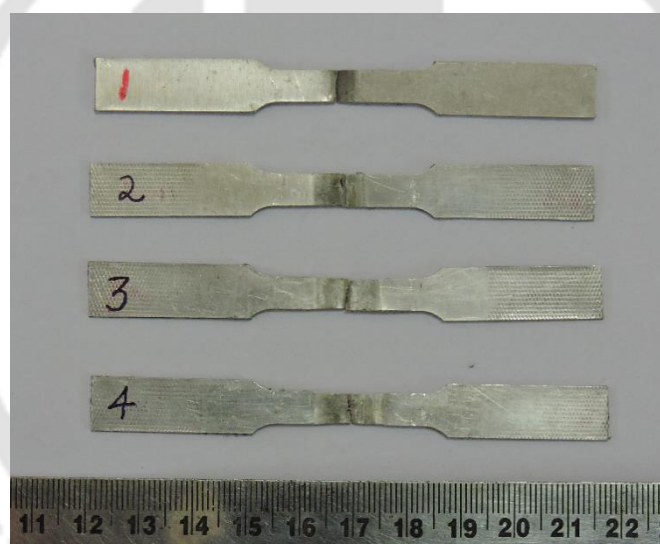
Tensile test specimens showing fracture at weld.
